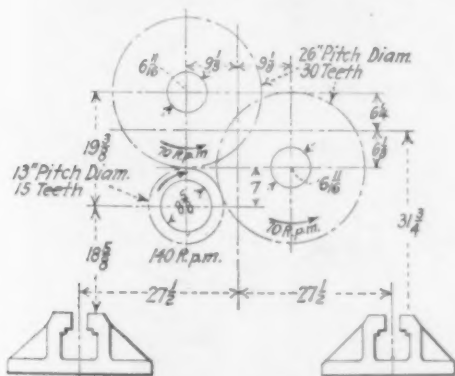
Gears of Roll Drive of the 14 $\frac{1}{4}$ -in. Hollow-Rolling Mill
